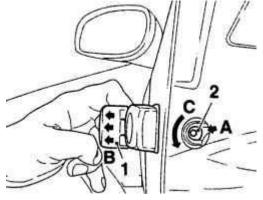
Secure the outer knob dragged into position (arrow B): 1 - outer handle 2 - core, 3 - locking bolt
